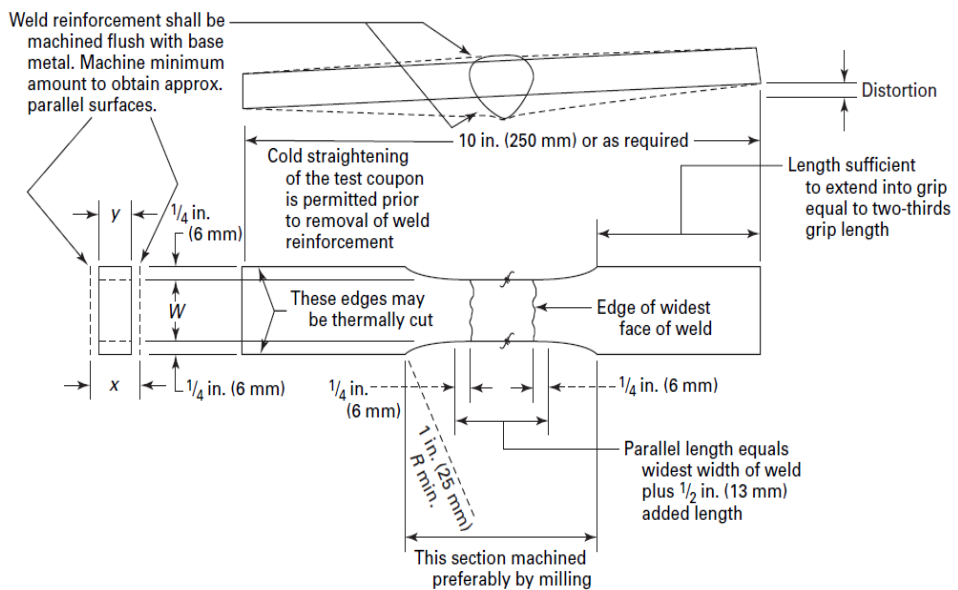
Schematic illustration and dimensions of transverse tensile weld samples [22].
